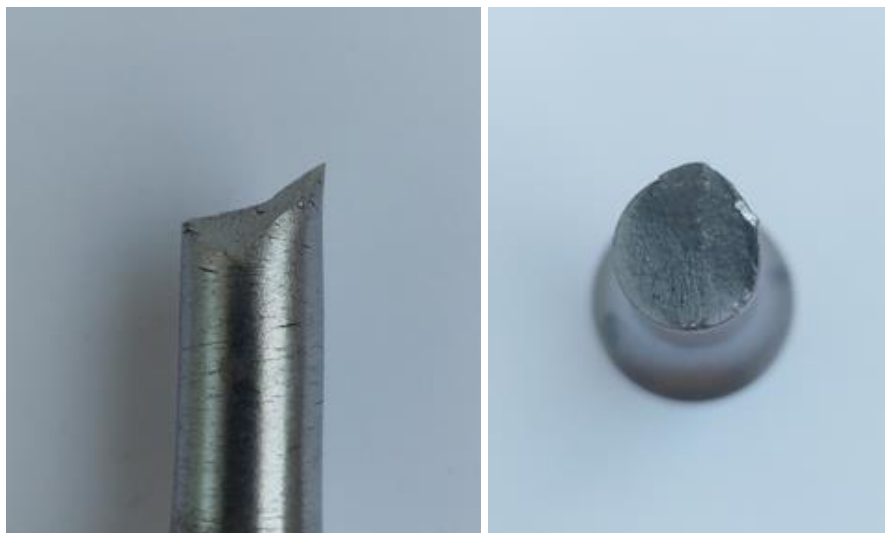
Side and Top Views of Fracture Surface at Fatigue Test 2
